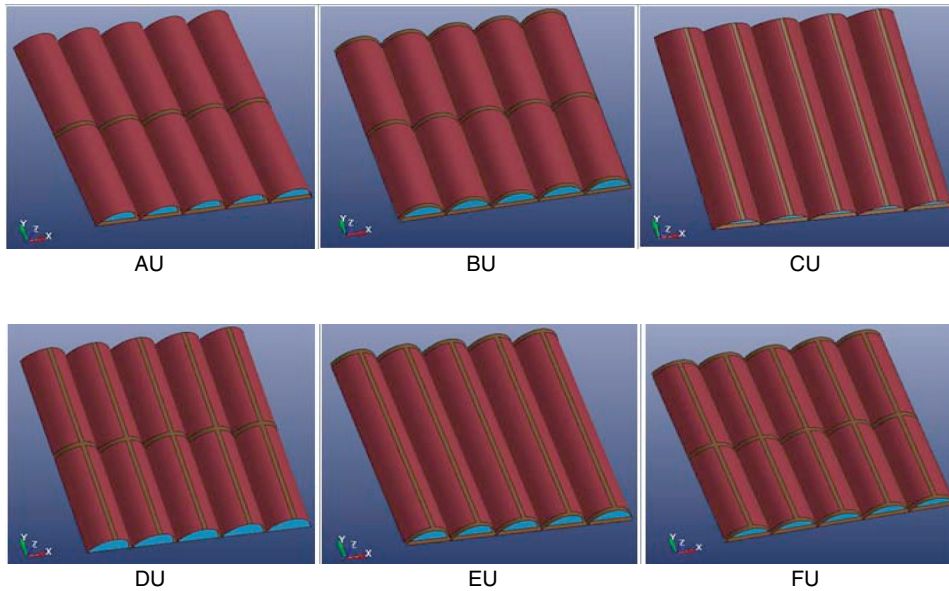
Six different stiffener arrangements on arched layer (AU-FU)
